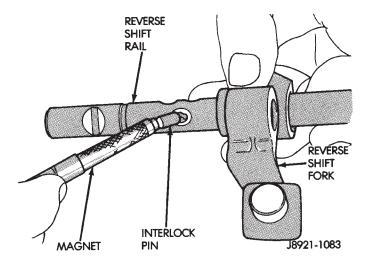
Remove Reverse Shift Rail Interlock Pin
